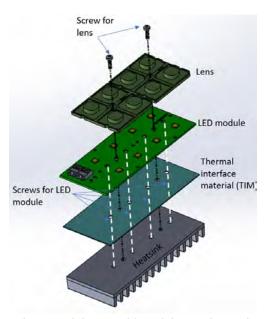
A typical LED module assembly with heatsink, TIM, lens and screws.
